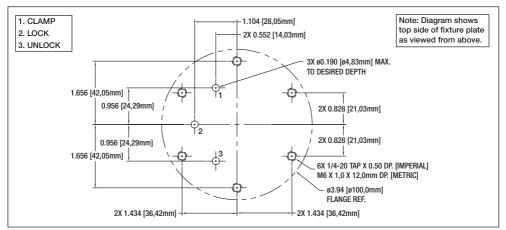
, Mounting Dimensions, Models MPFC-110V, WPFC-110V
